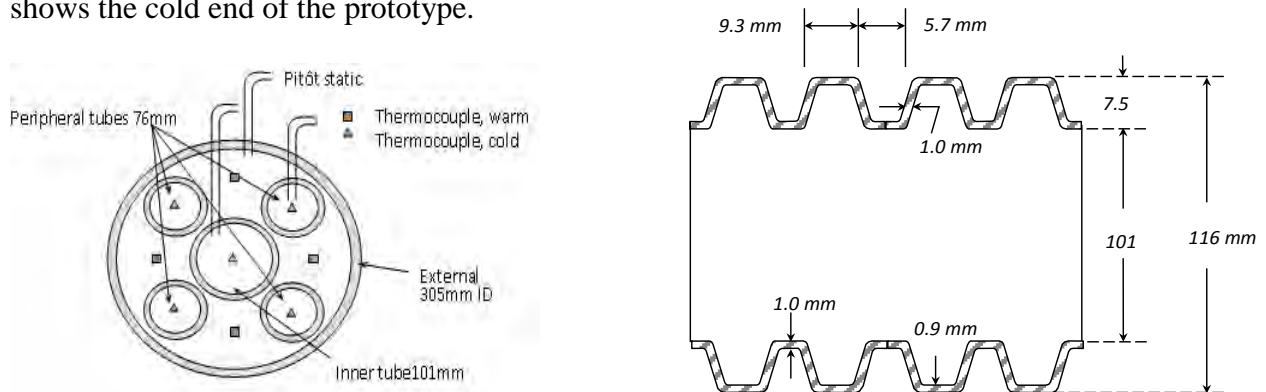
Schematic of the prototype: (left) cross-section; (right) longitudinal cross-section and geometrical details of the 101mm I.D. tube
